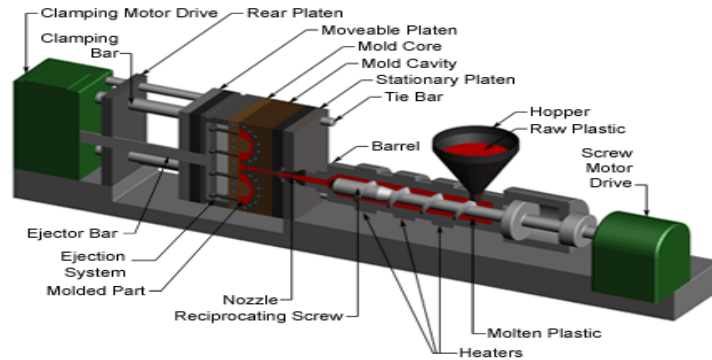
Injection moulding machine (www.custompartnet.com).
